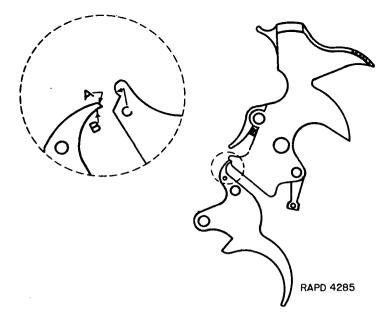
HAMMER AND TRIGGER MECHANISM, COLT REVOLVER, CAL. .45, M1917
